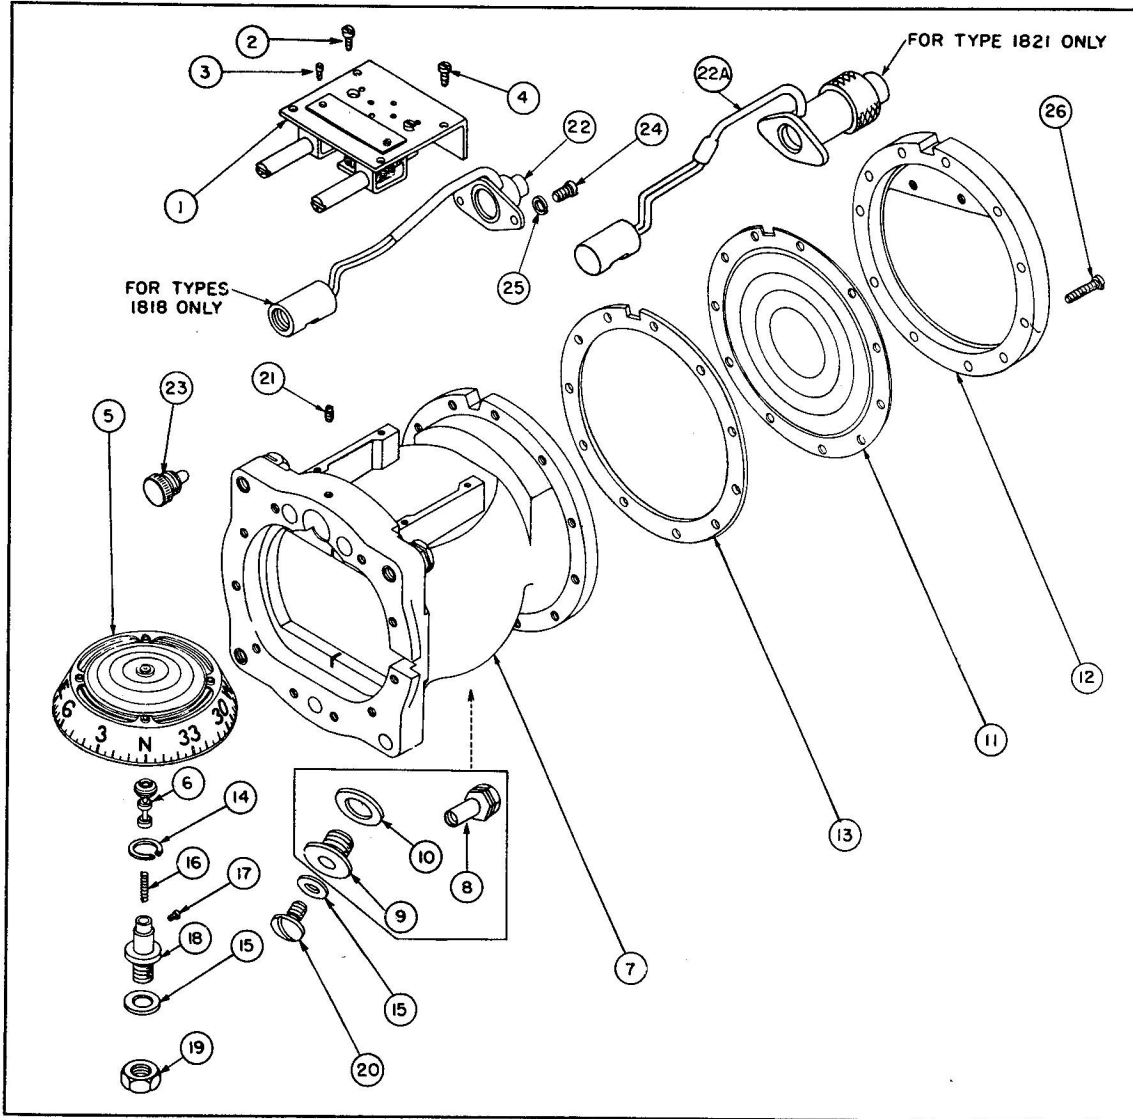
Exploded View - Compass - Type B-16 (Pioneer Types 1818-1-A, 1818-4-A, and 1821-2-A)
